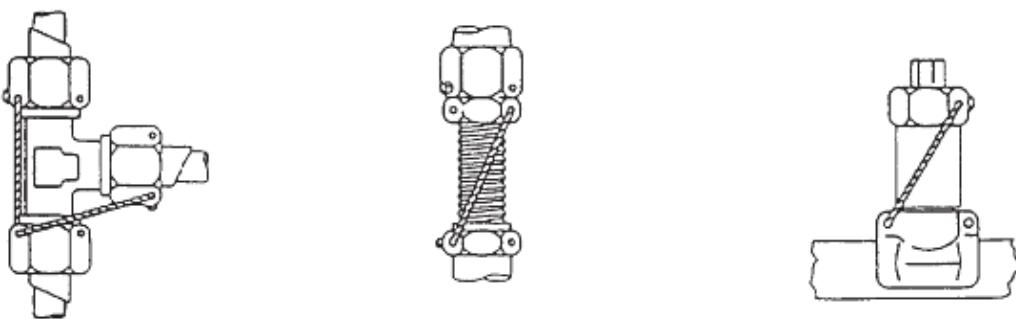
Example of Safety Cable Installation – Tube Couplings
